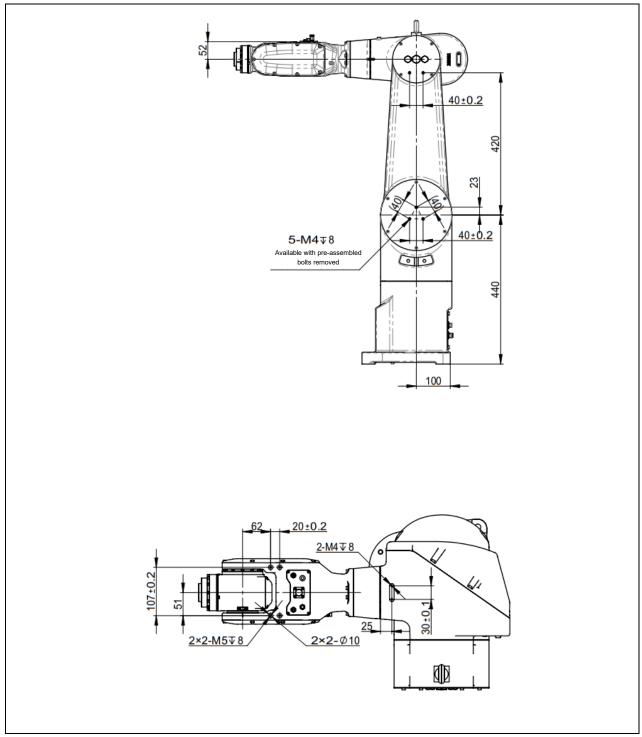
Equipment mounting surface (ER10-900-MI/HI)
